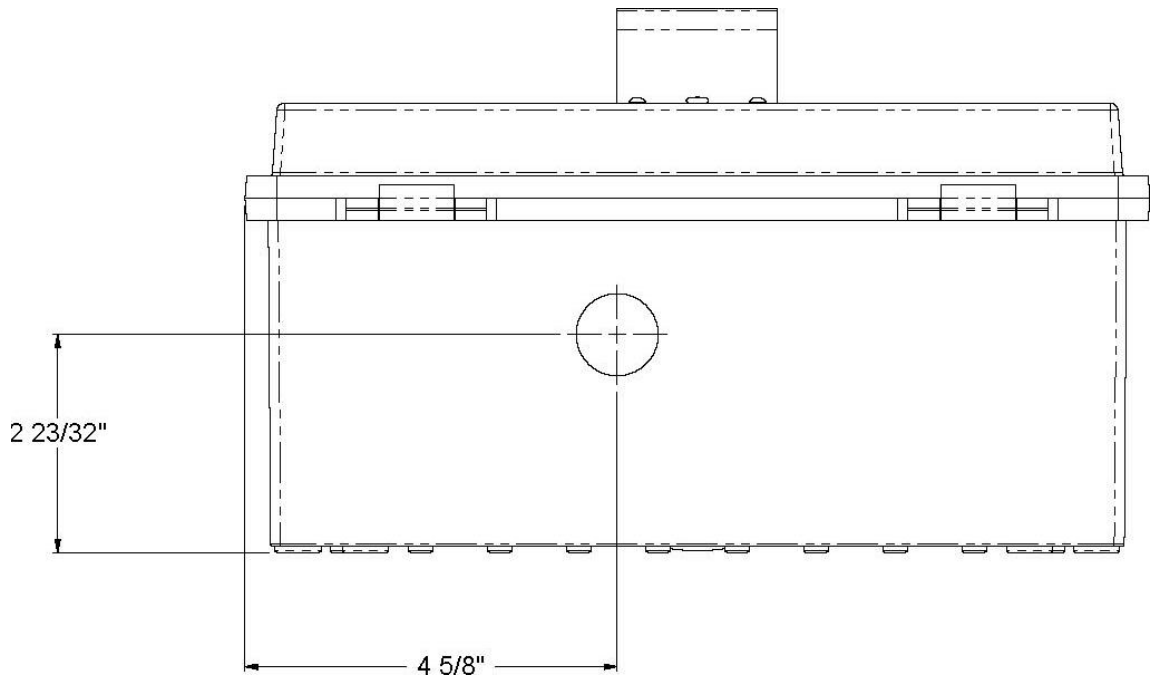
Remote MRU Bottom Cable Penetration Location (Bottom View)
